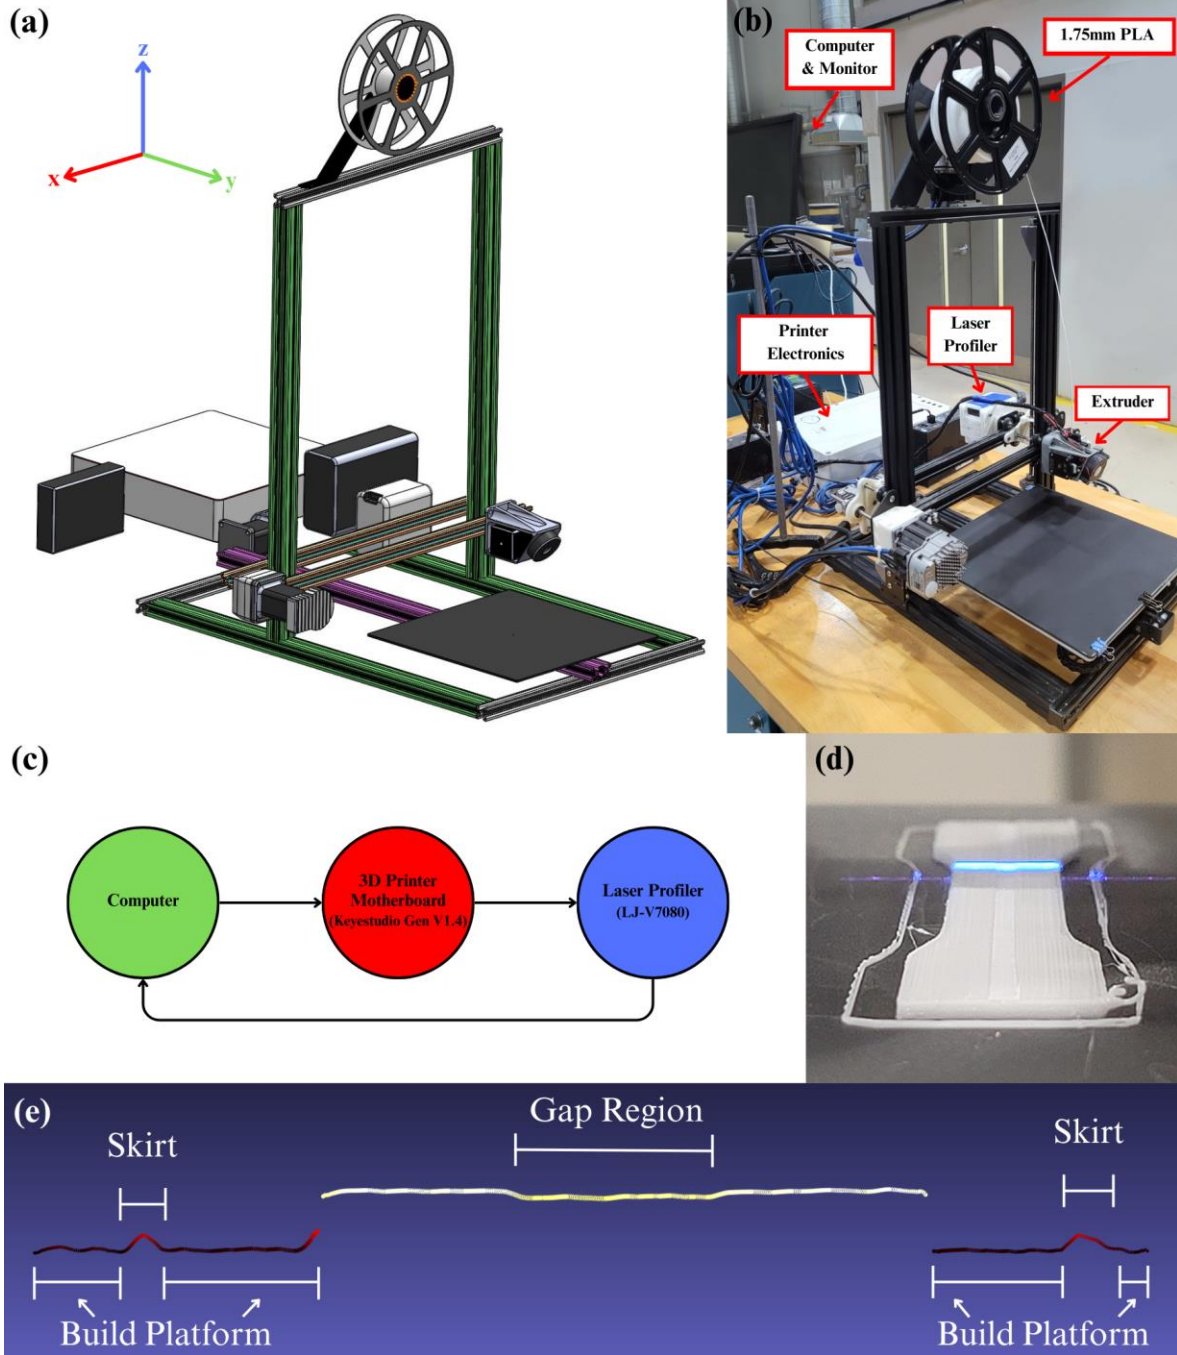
Integrated 3D printing and laser scanning apparatus: (a) schematic of the apparatus; (b) the final assembly including hardware and electronics; (c) the integration process; (d) laser
